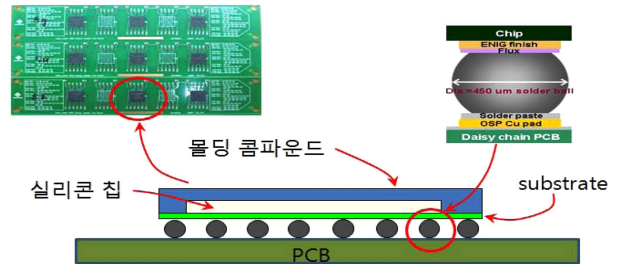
Section of the PBGA and the surface treatments of the Cu pad.
